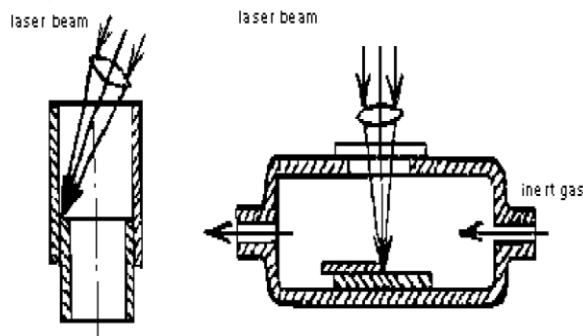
Examples of laser welding - a/ at a spot hard to access, b/ in an inert atmosphere
